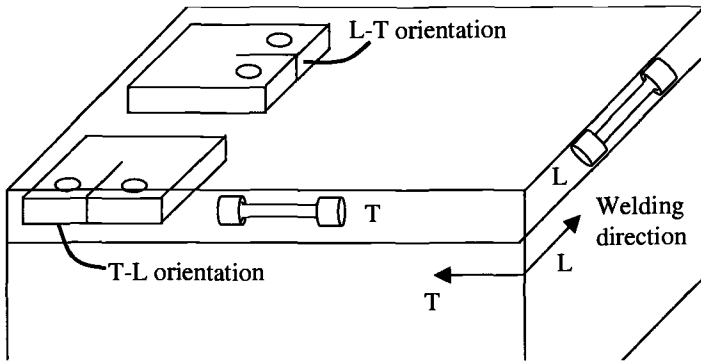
C(T) and tensile specimens machined in the plane of the cladding.
